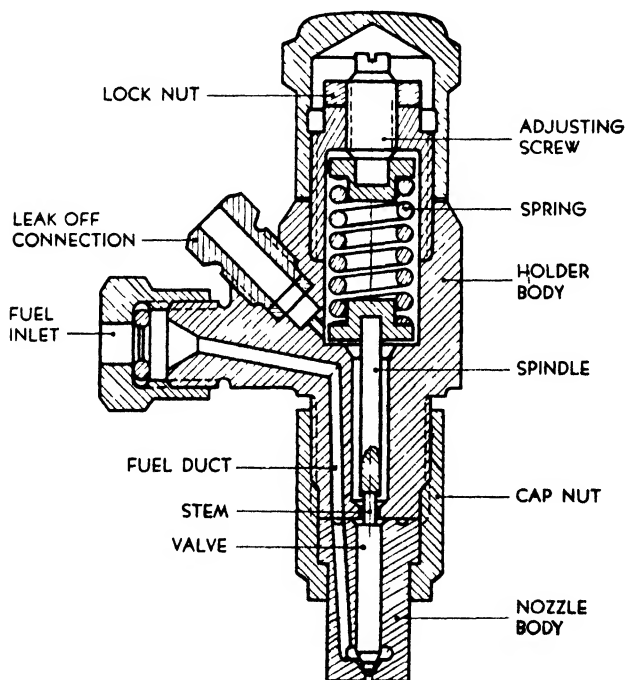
AMERICAN BOSCH FUEL-INJECTION NOZZLE.
